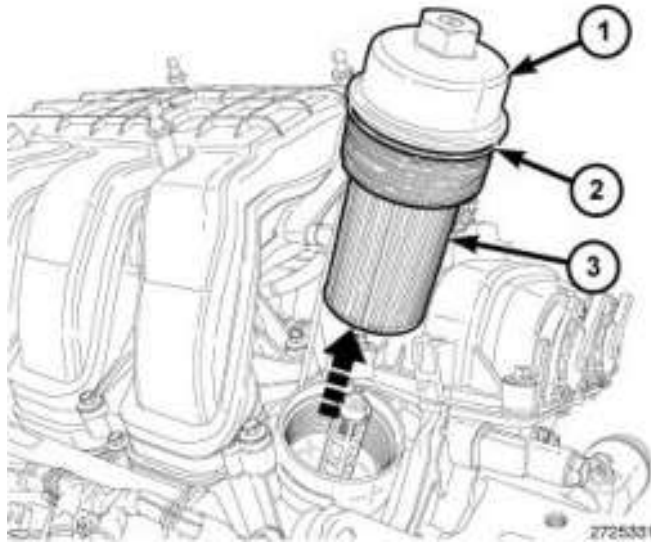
Oil Filter Cap, O-Ring Seal & Oil Filter
